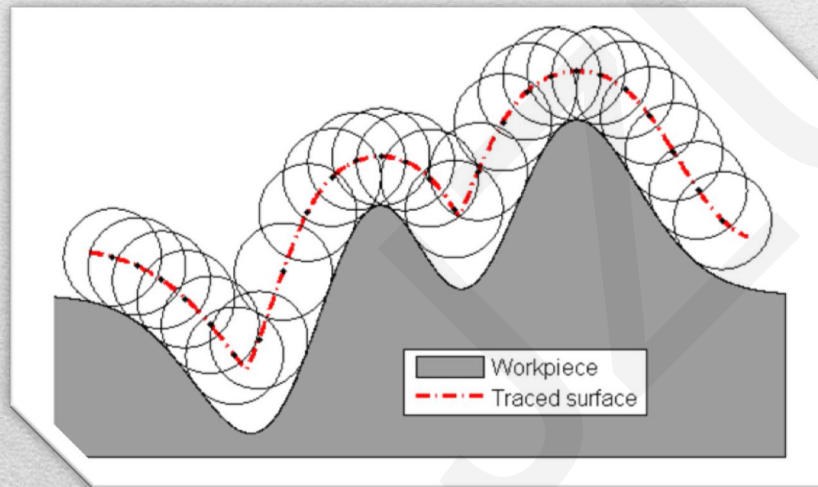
Scanning of the workpiece surface by a probe. Fig. 4 Reconstruction of the workpiece surface.
